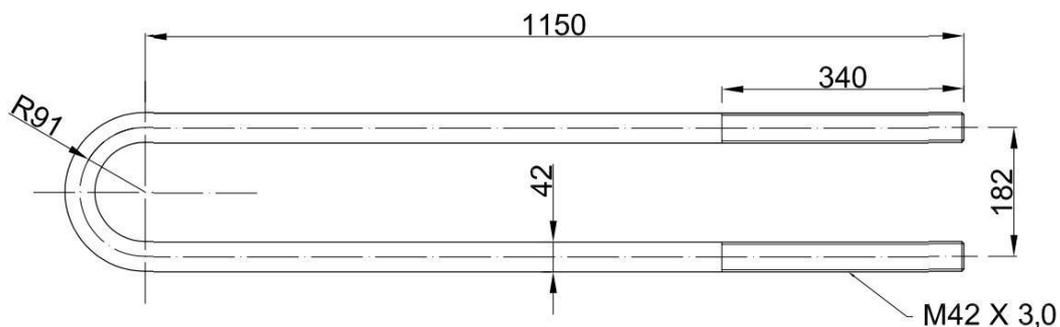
Technical drawing of Stacker Reclaimer tie rods. Data provided by the company. Dimensions in mm. The fracture occurred on the threaded region, close to the interface of the unthreaded region.
